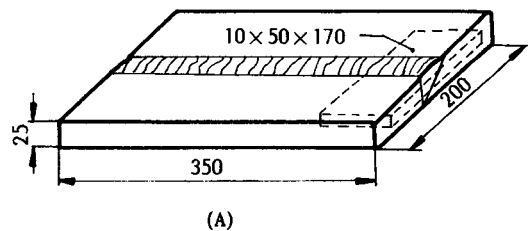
Welding plate configuration and specimen dimensions for fatigue test
